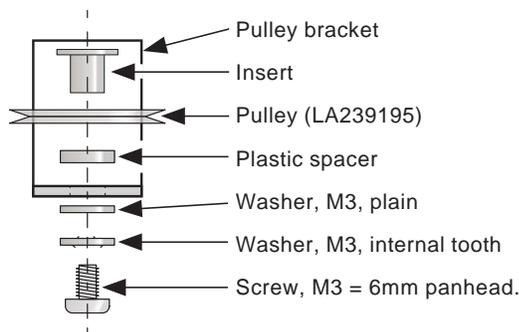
Assembly of the pulley to the pulley bracket
